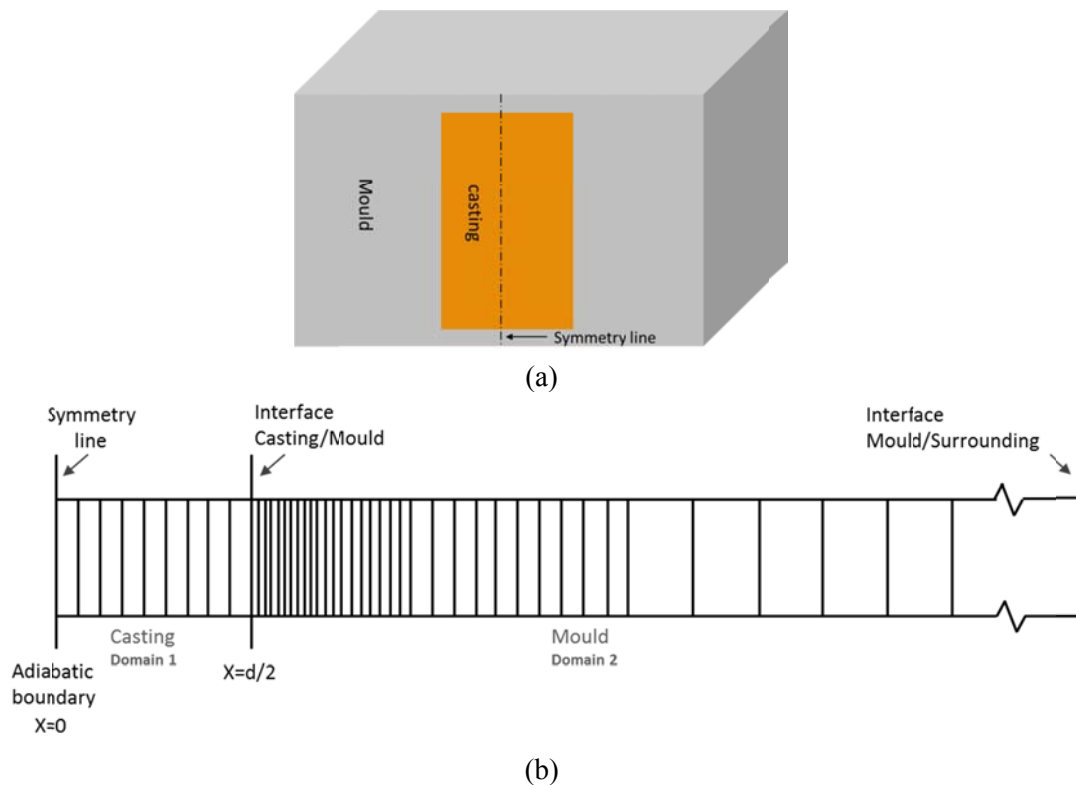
The schematic illustration of casting geometry and enmeshment; a) Schematic lay-out of casting and mould for plate geometry; b) 1D enmeshment of casting plate and sand mould
